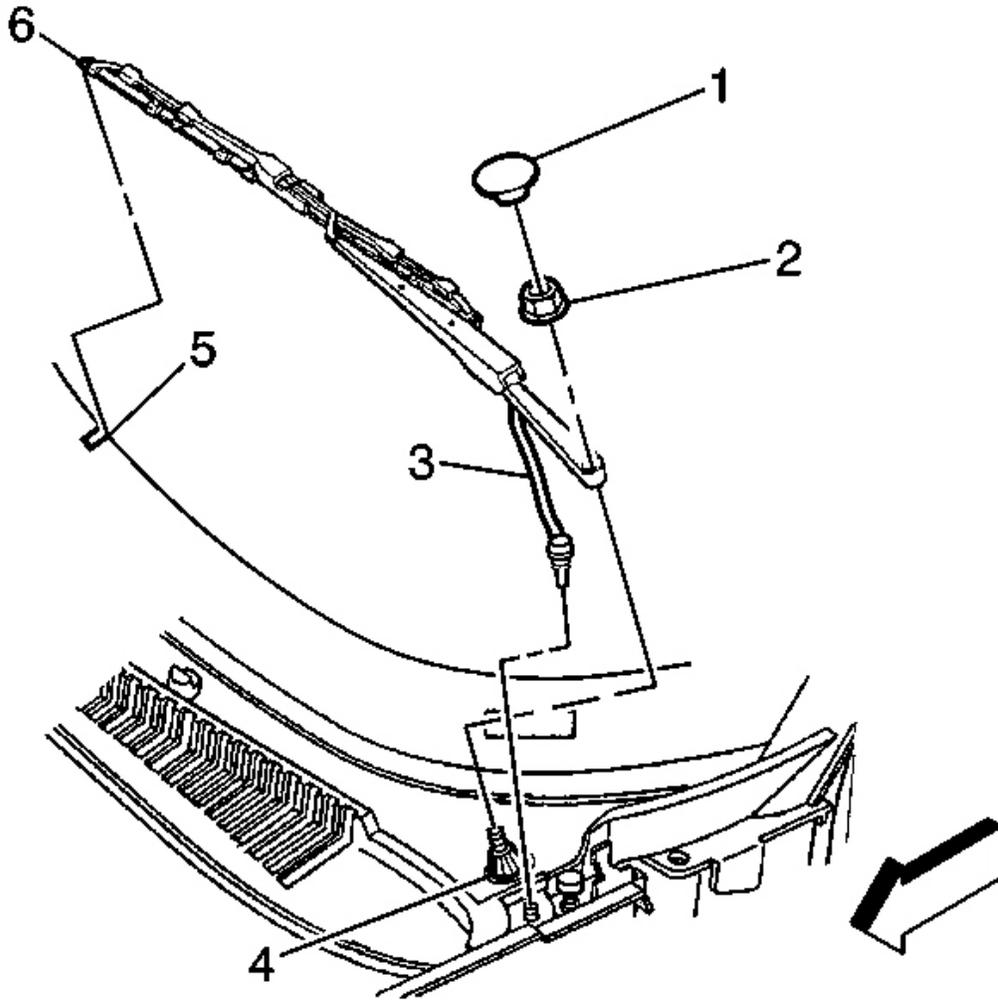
Windshield At Tip Of Wiper Blade To Wiper Arm
